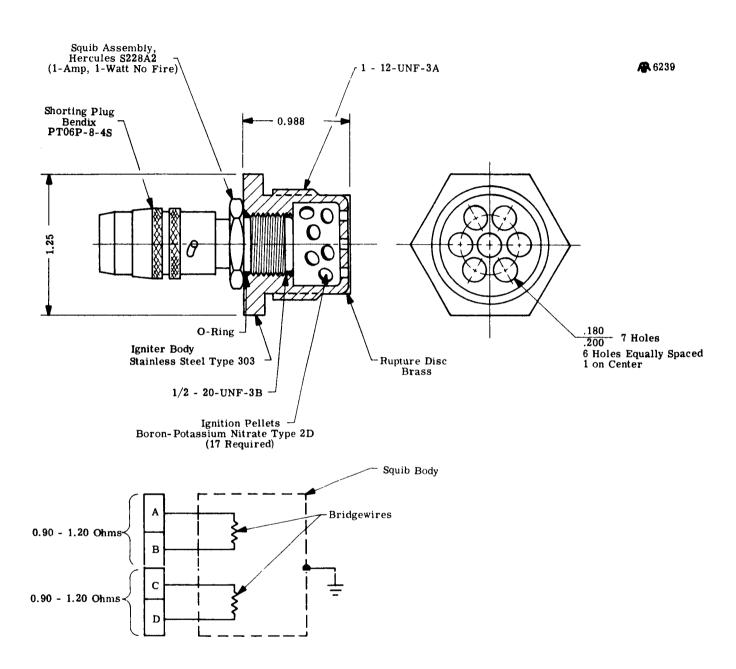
Cross Section and Circuit Schematic of Igniter Model 502.
